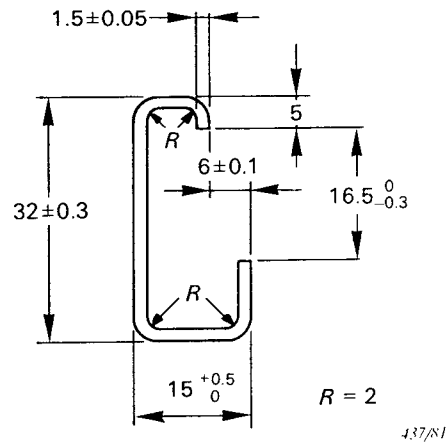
Dimensions of “G” section rails, in millimetres.
